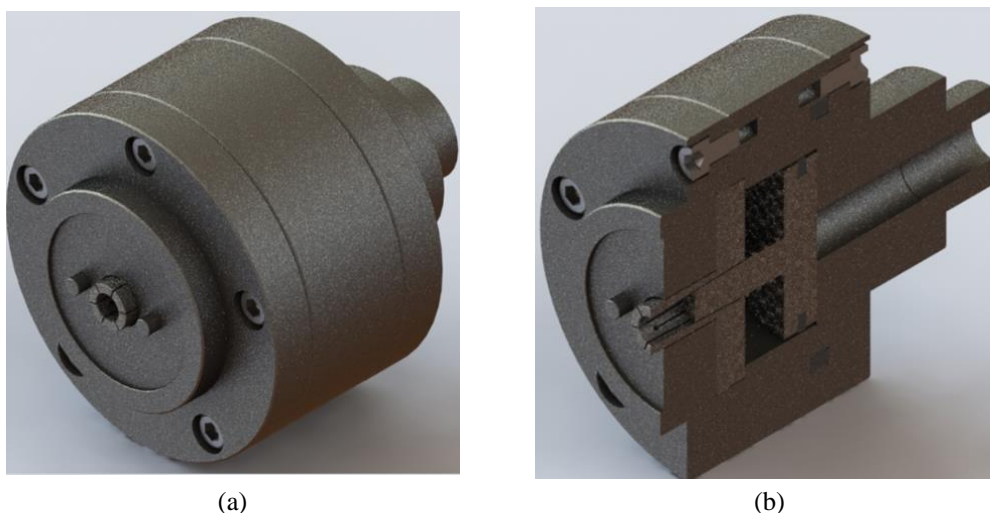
Design Results (a) Overall Isometric View and (b) Section Isometric View
